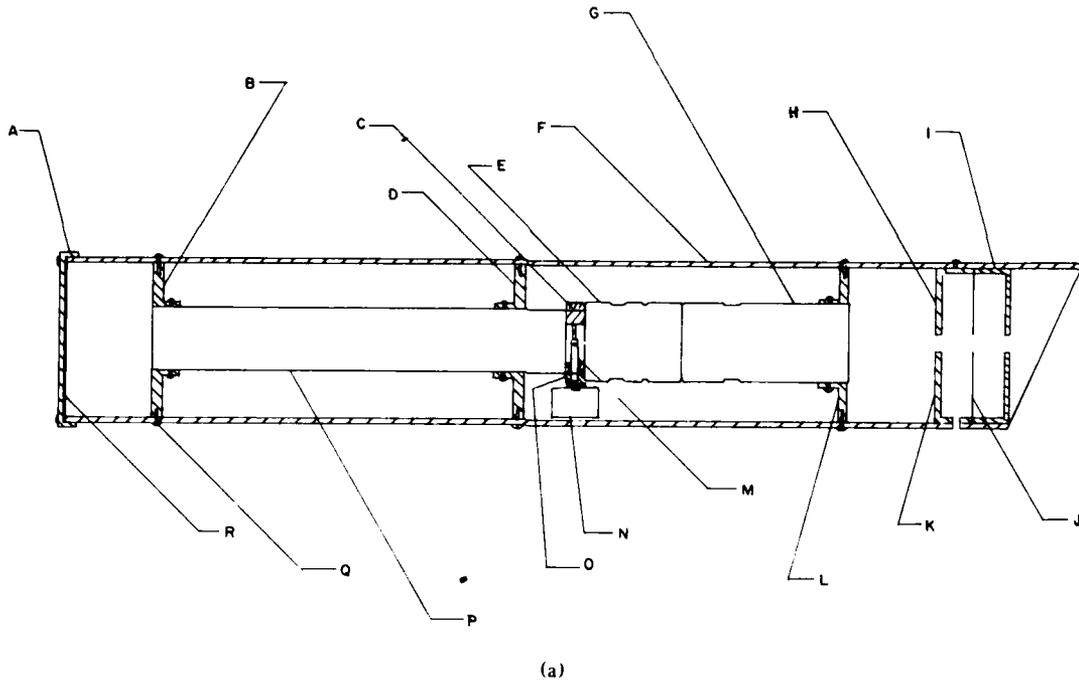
Calibration assembly; unless otherwise specified, tolerances are  $\pm .002$ :
